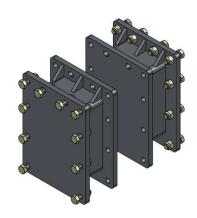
REMOVING OLD ARM BOLT/NUT (6 TON)
